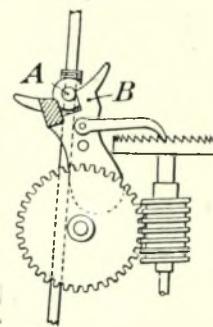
Illustrating the counting mechanism of the Moulin-Favre-Bulle clock.
